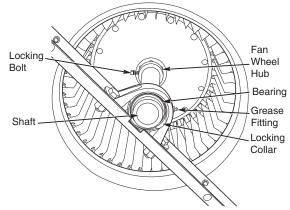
Fan Shaft, Bearings, and Fan Wheel (Typical)
